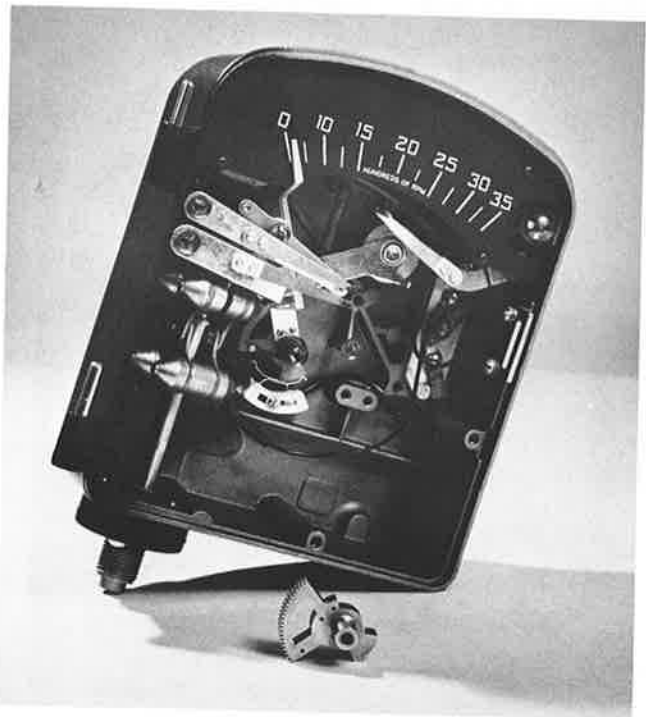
NICKEL SILVER GEAR AND CAM FOR AUTOMOTIVE RECORDING TACHOMETER.
